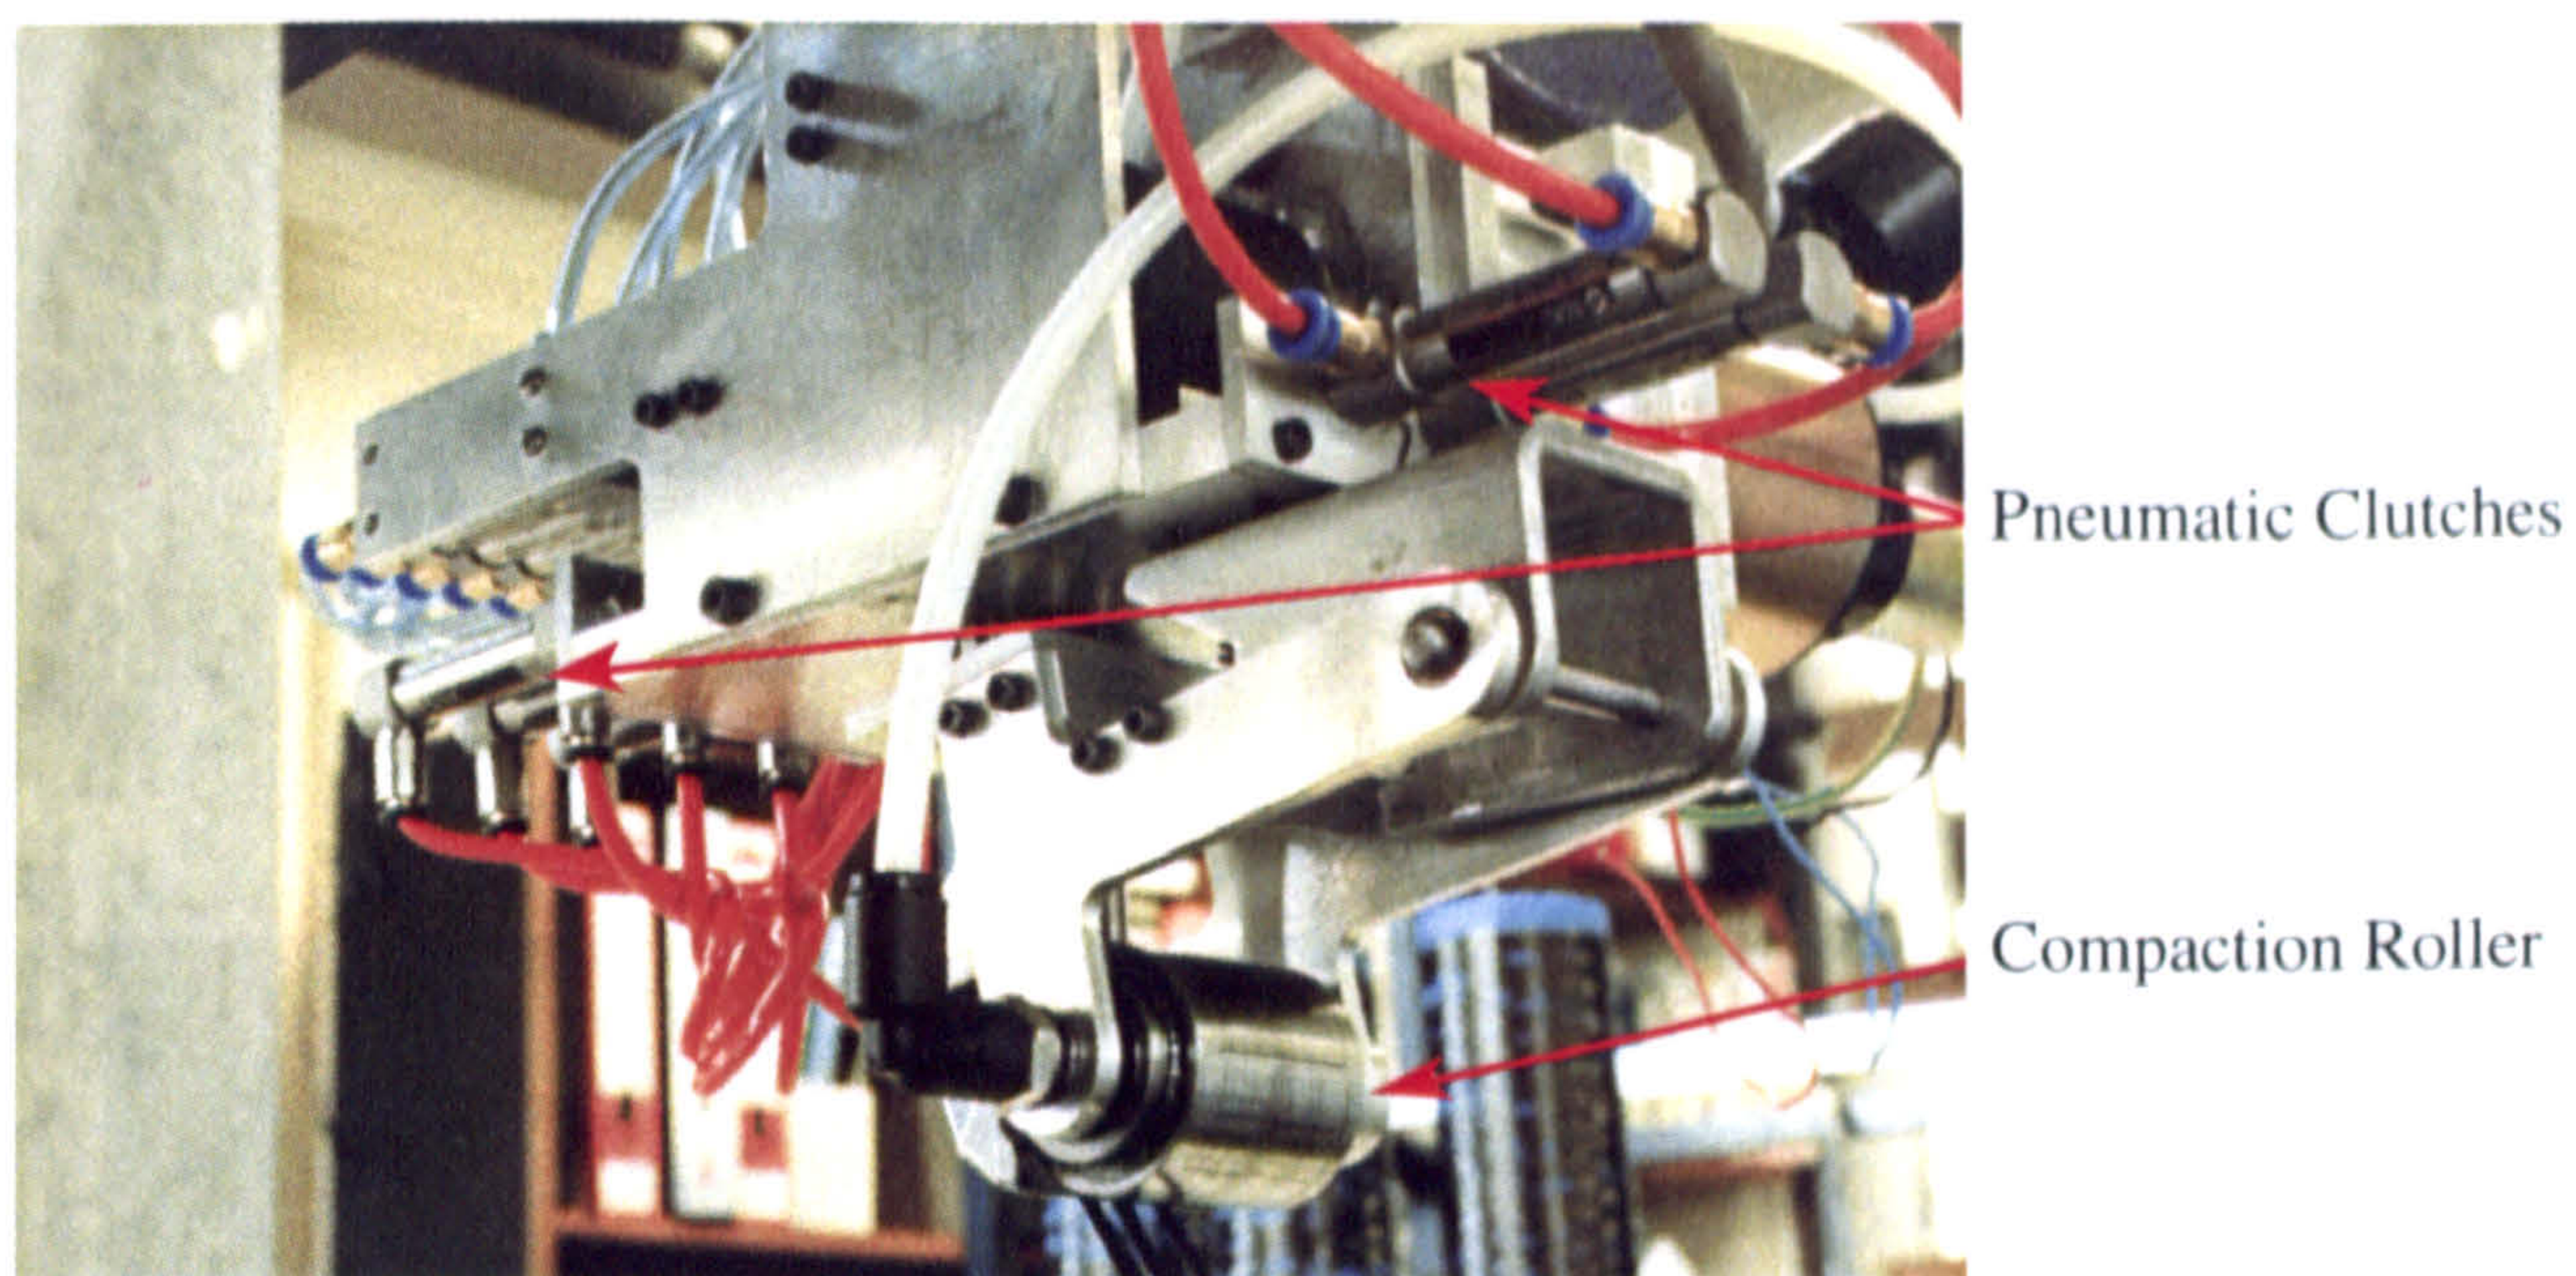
Underside of multi-tow roller head showing compaction roller and tow cutting system
